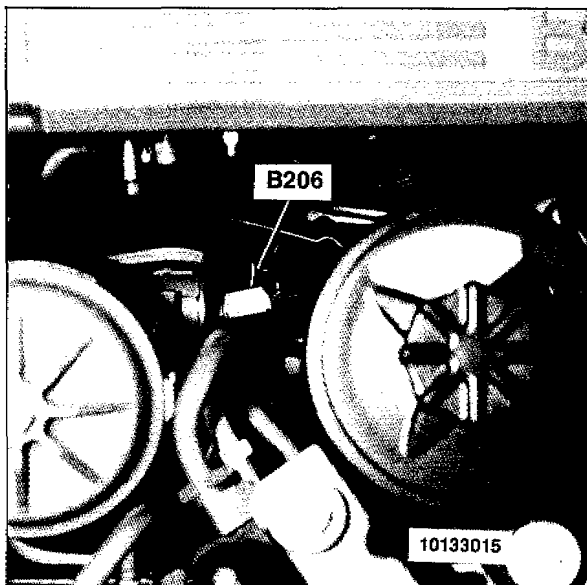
LH Side Of Engine Near The Wheel Well (750iL)
